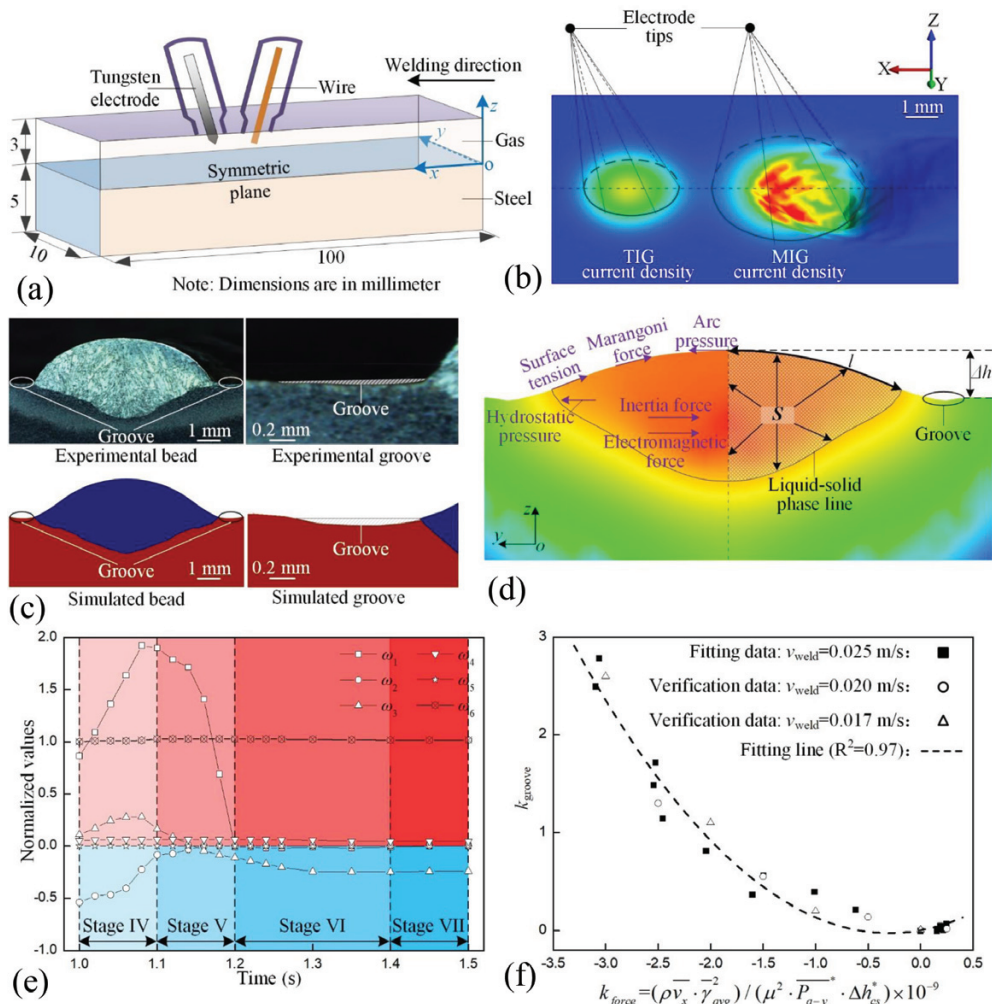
Numerical analysis of the behavior of the molten pool and the suppression mechanism of undercut defect in TIG-MIG hybrid welding
